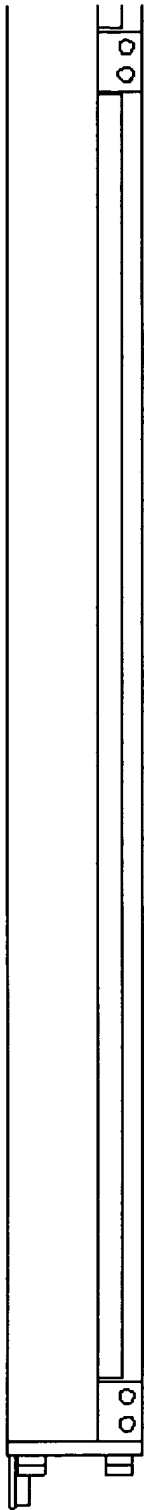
C: Front view of the right end of a ceiling frame (20 foot collapsible cargo container)
